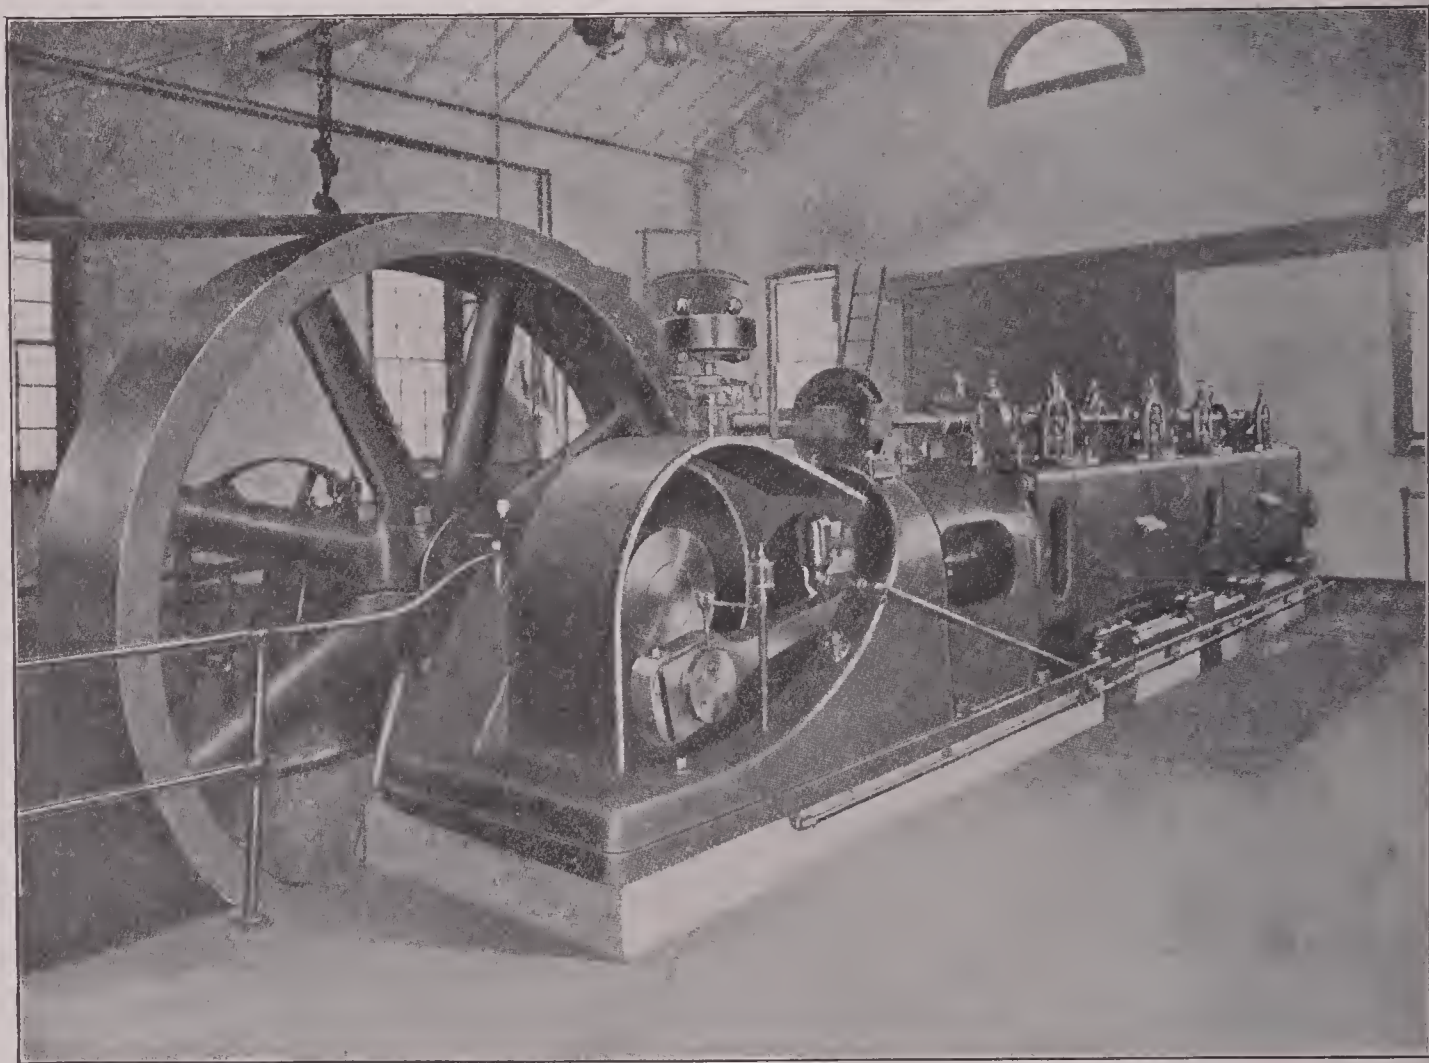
Front View of Riverside Gas Engine at the Watson-Stillman Plant, Aldine, N. J.
